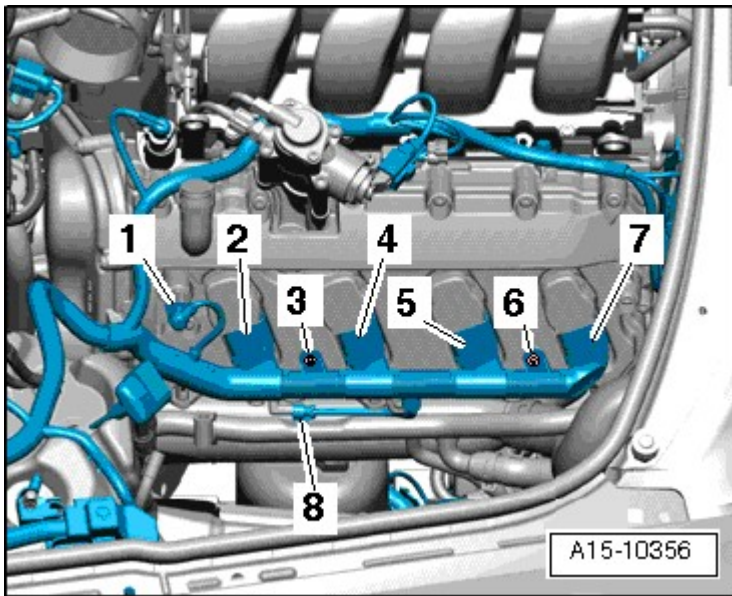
Removing Bolts On Right Cylinder Head & Disconnecting Electrical Connectors
